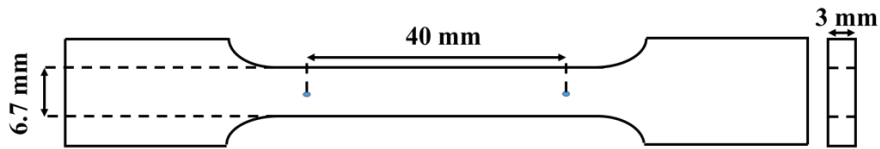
Geometrical dimensions of the uniaxial tensile test specimen.
